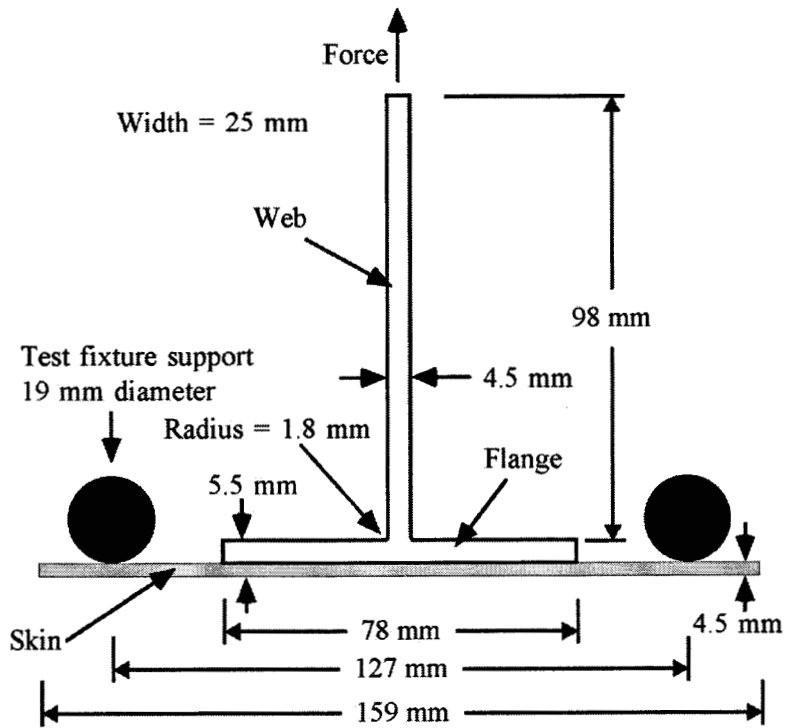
Skin-Stiffener Loading, Geometry and Dimensions.
